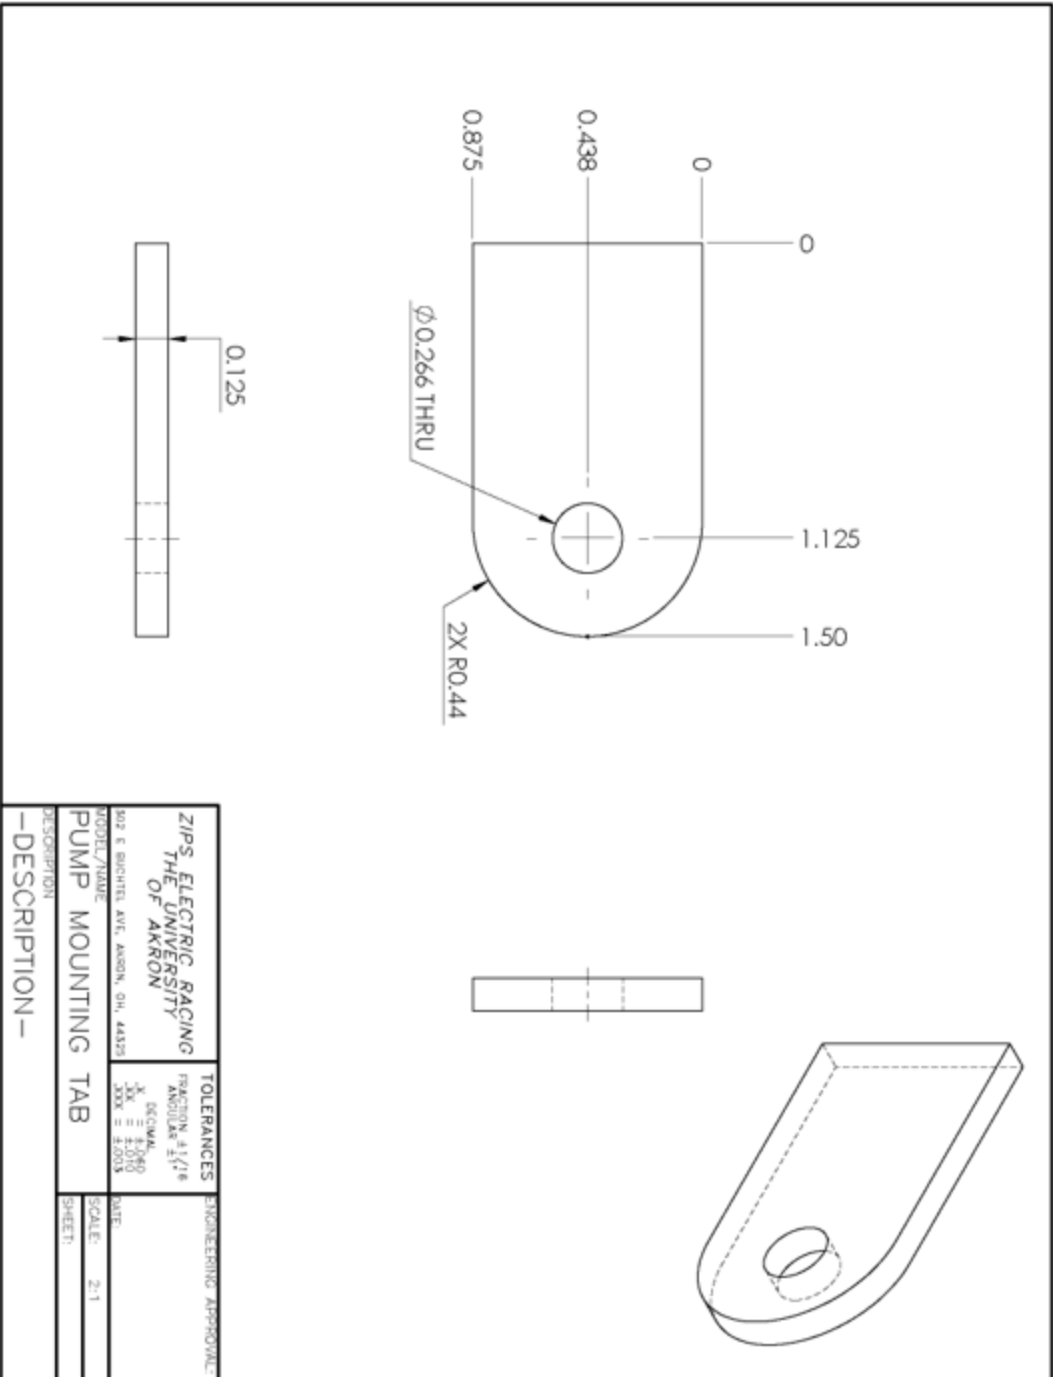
Manufactured Mounting Tab for the Water Pump
